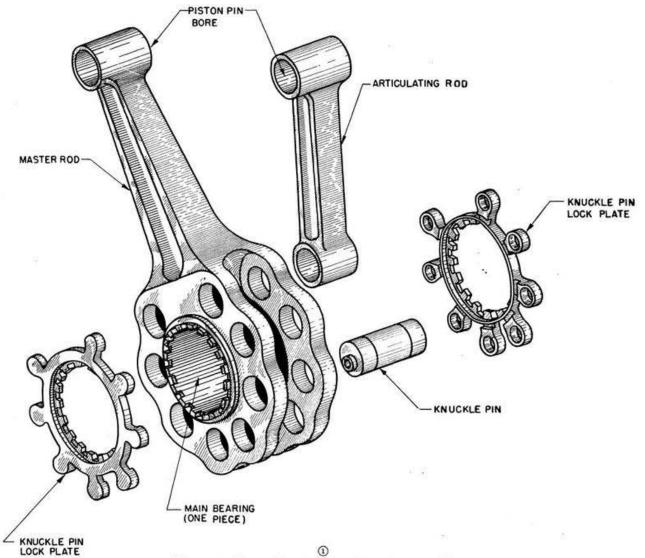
Types of knuckle-pin and lock-plate assemblies.
